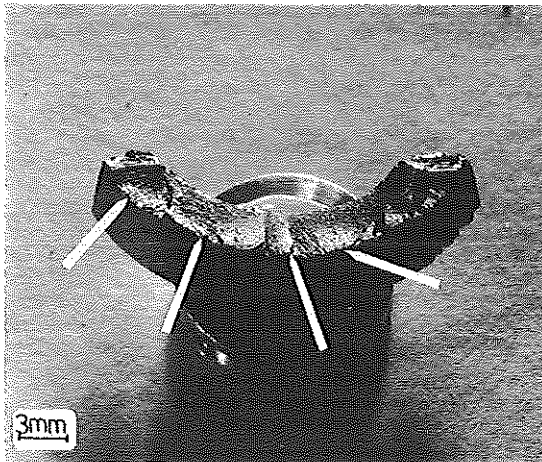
Fatigue fracture surface of a push-pull specimen ($\Delta\epsilon_t = 1.05$ per cent), showing four crack initiation sites
